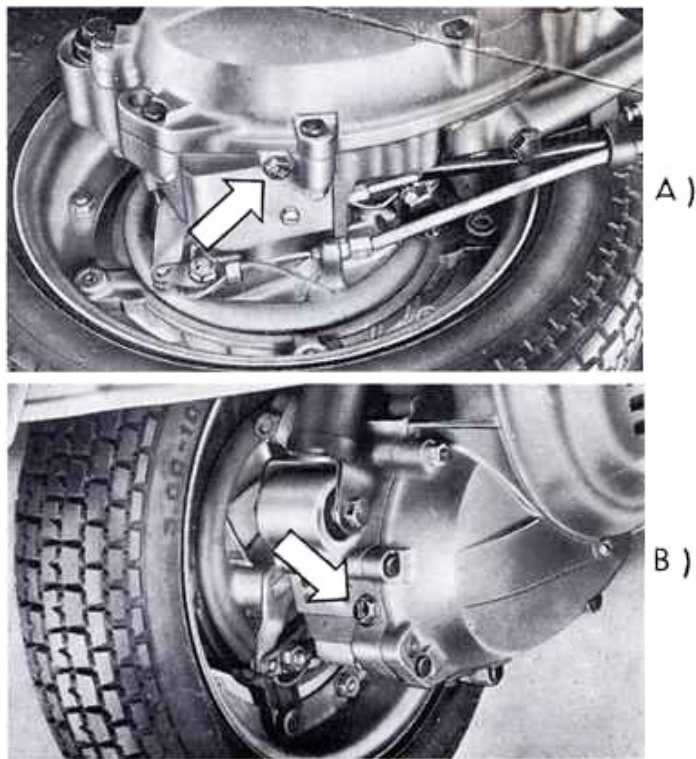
Gearbox oil drain hole "A" and fill hole "B"
